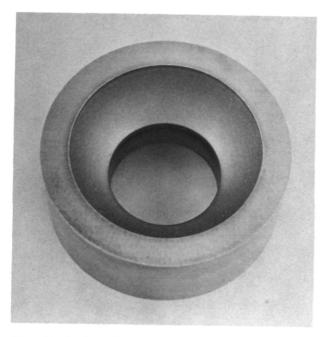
Bearing as diamond ground and electrodischarge machined.
